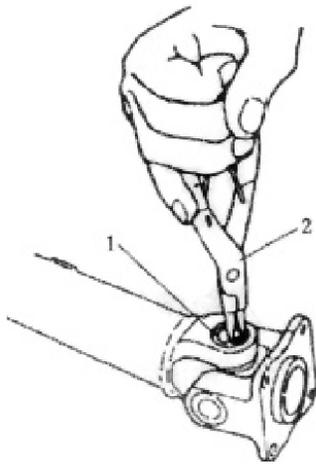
Disassemble clamp ring of bearing of universal joint
